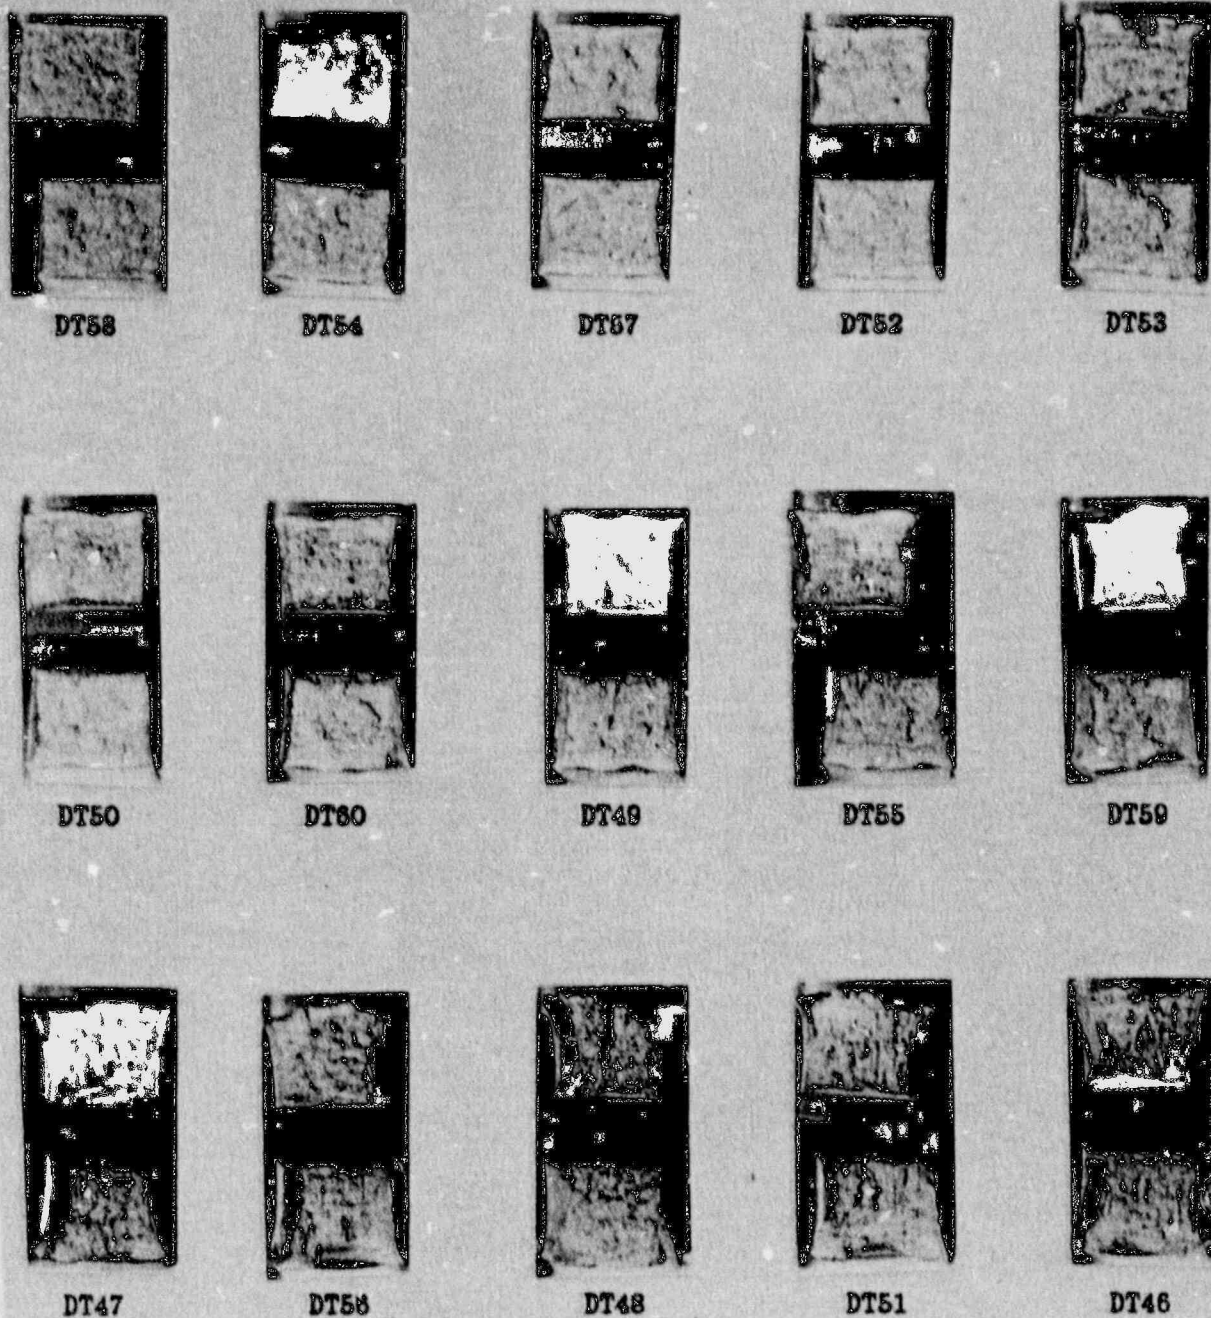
CHARPY IMPACT SPECIMEN FRACTURE SURFACES FOR MCGUIRE UNIT 1 REACTOR VESSEL SHELL PLATE B5012-1 (TRANSVERSE ORIENTATION)
